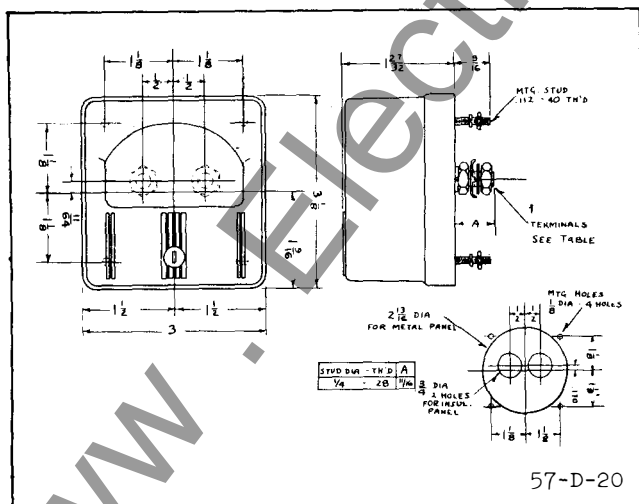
Outline and Drilling Plan of the Projection Type Test Milliammeter. For Reference Only.
